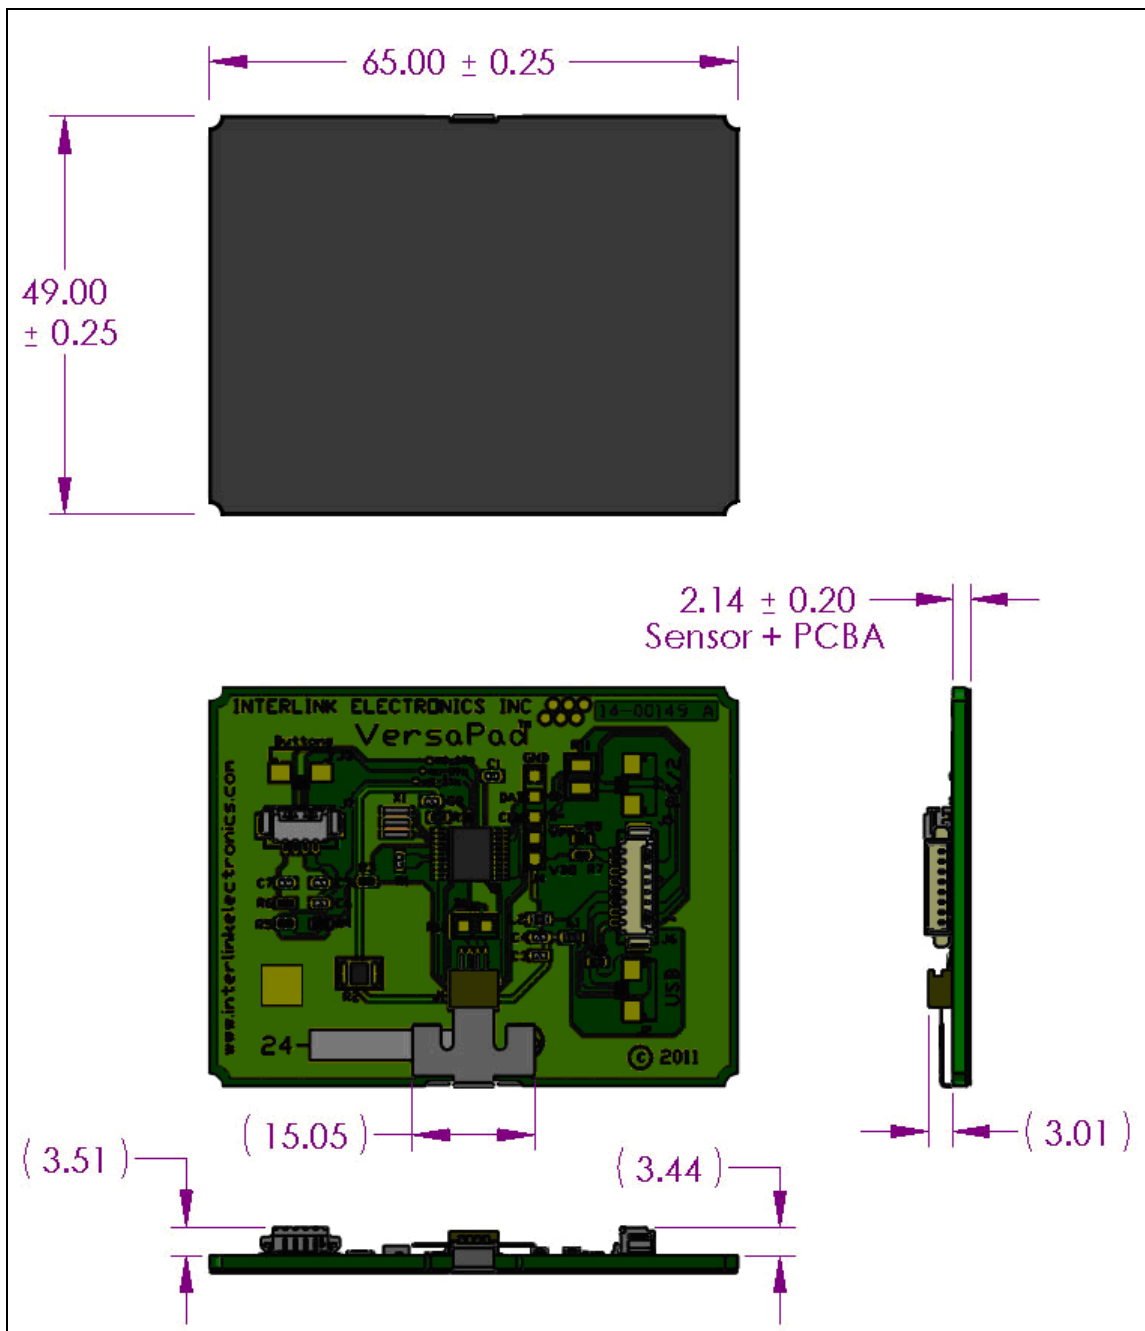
Overall dimensions of VersaPad. All dimensions are in mm.
